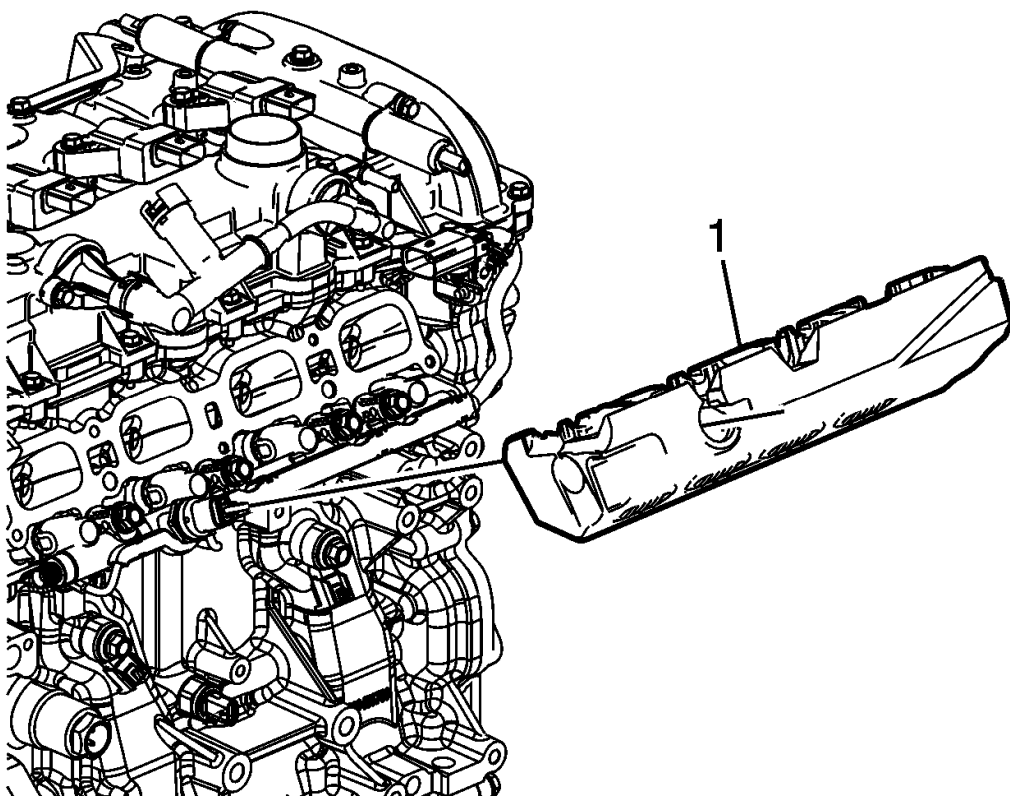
Fuel Injection Fuel Rail Noise Shield
